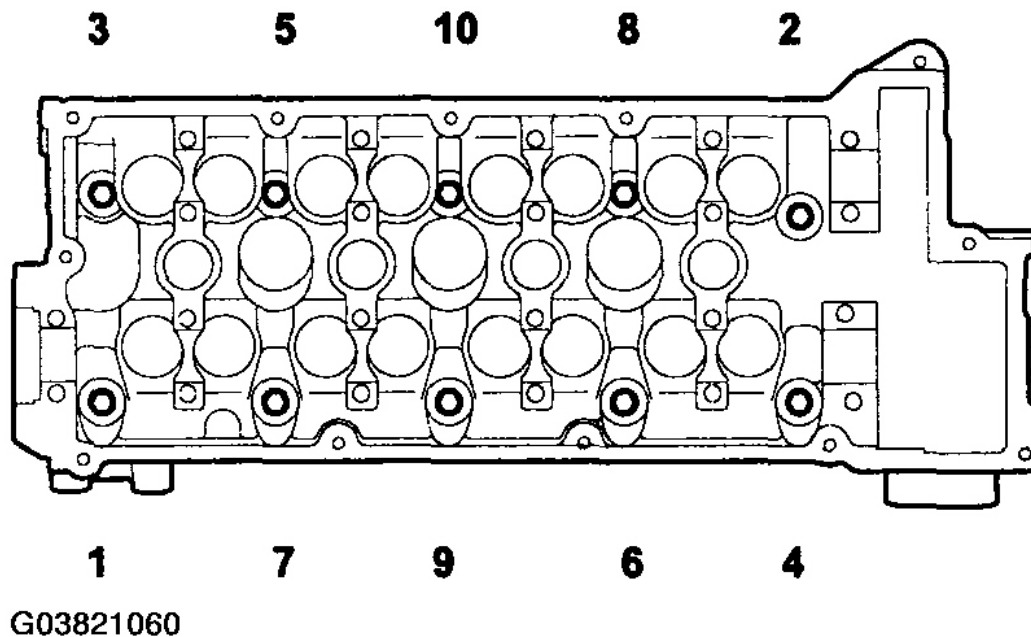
Removing Cylinder Head Bolts And Plate Washers
